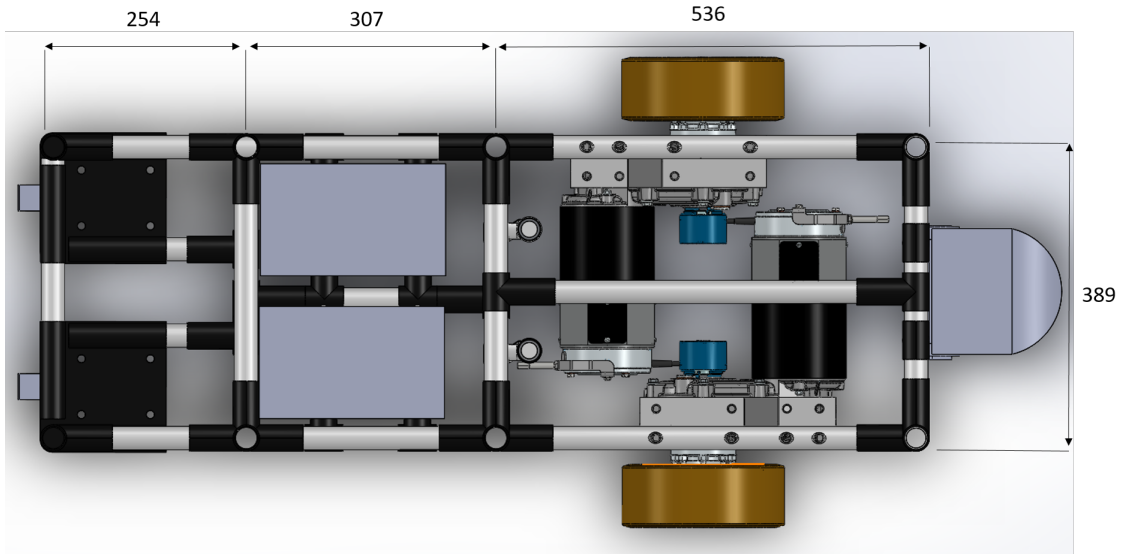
Two drive wheels configuration, AGV 3D model top view
